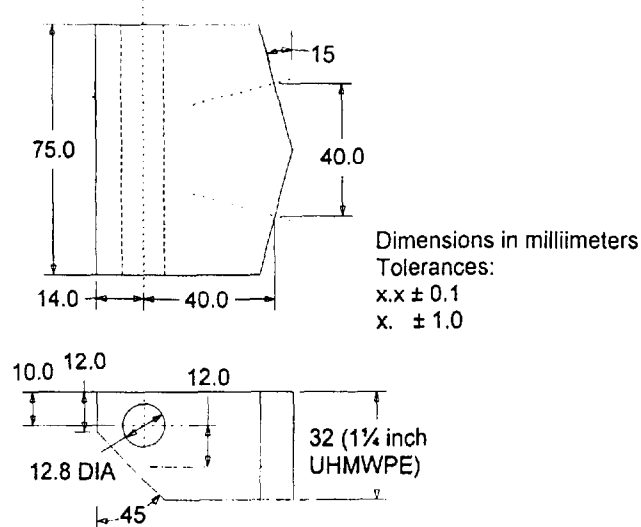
Lumber Bilateral UHMWPE Block For Screws or Bolts
